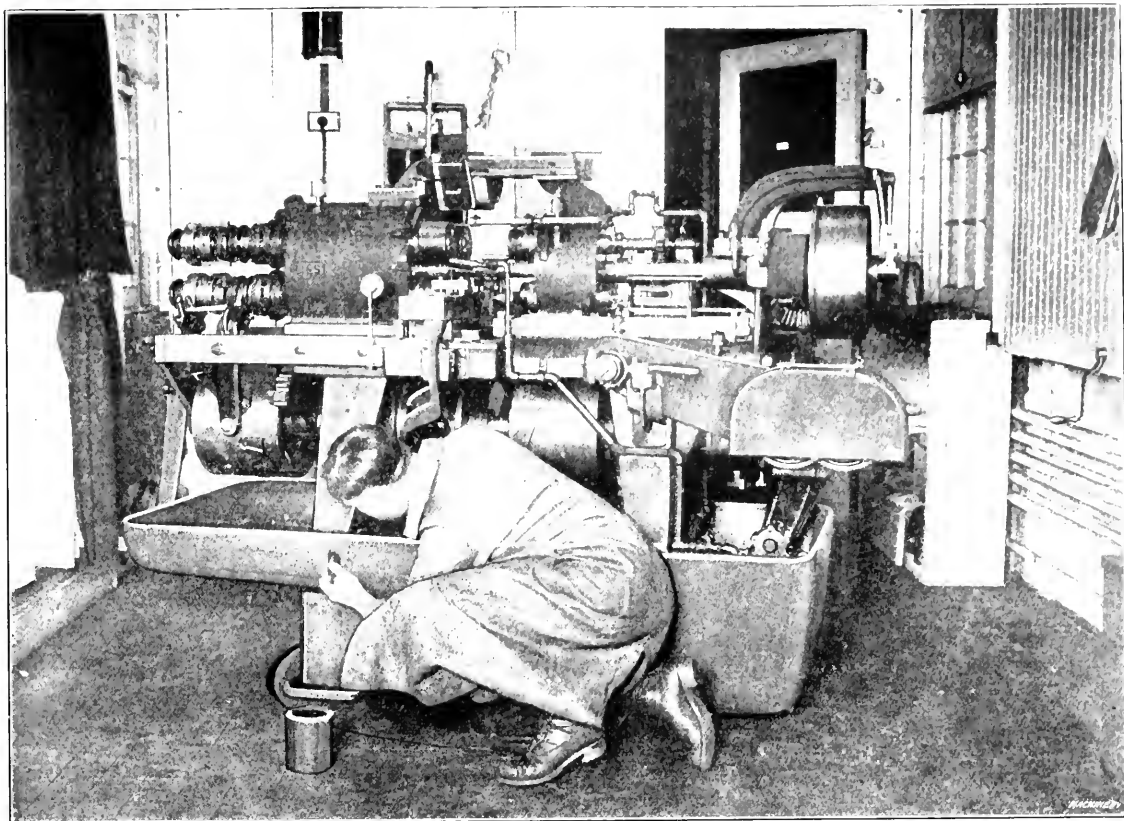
Painting a Machine with a Flat Oil Paint before photographing
